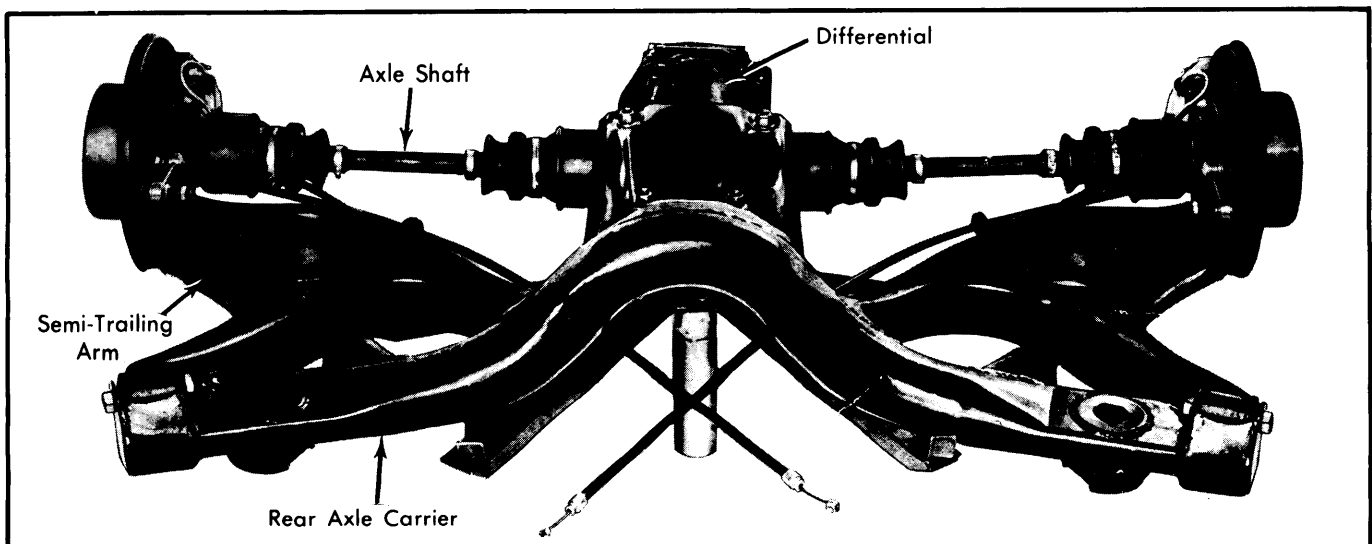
Typical Mercedes Benz Rear Suspension with Components Removed
